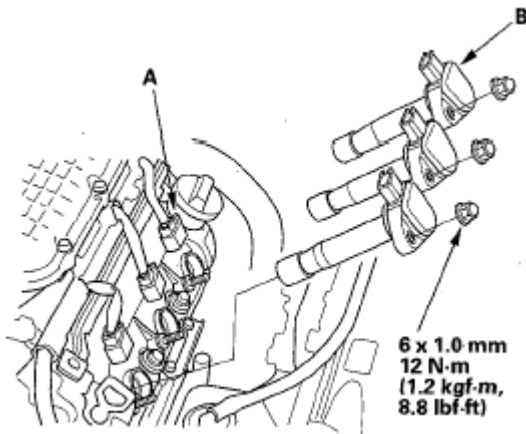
Identifying Ignition Coil Connectors And Front Bank Ignition Coils
